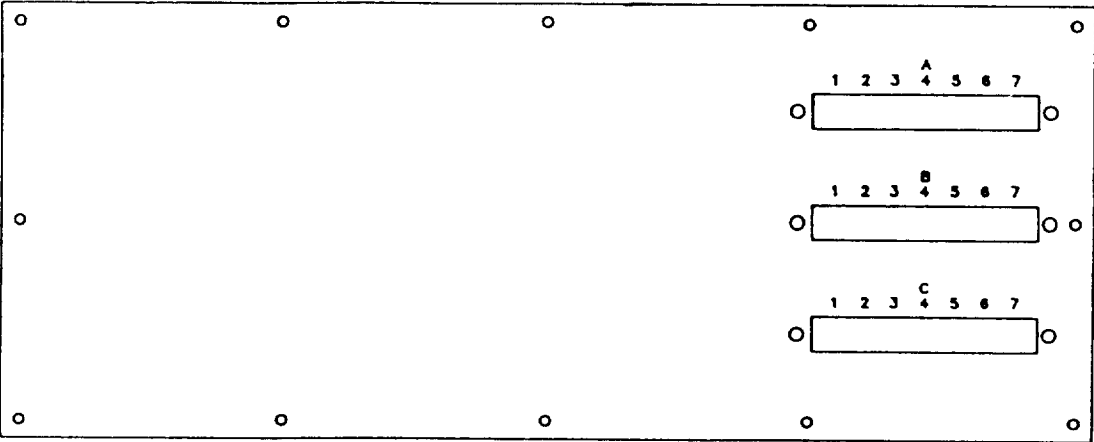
Layout of terminal blocks on the rear side of the 19" rack case.
